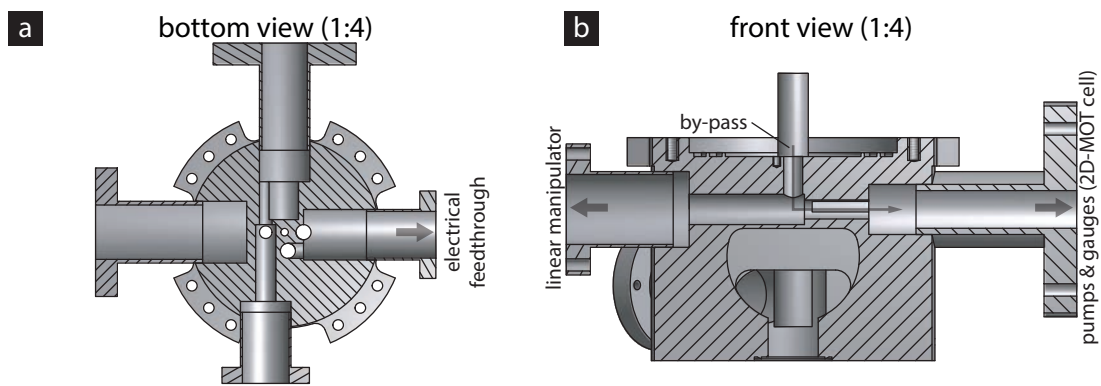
| Auxiliary pumping stage and wire conduits. (a) A horizontal section view centered to the flange carrying the high-power electric feedthrough shows the conduits used to connect it to the dispensers in the 2D-MOT cell in more detail. (b) The auxiliary pumping stage is shown in more detail in another section view in a parallel plane of figure A.3b centered to the flange carrying the linear manipulator, which is used to block or unblock the by-pass of the upper DPS.
